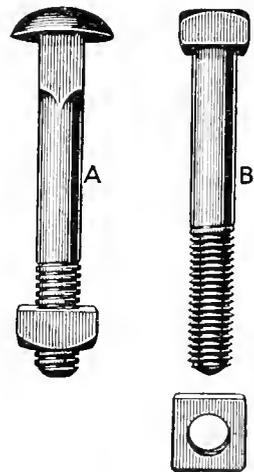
Bolts: A, carriage bolt; B, machine bolt.
